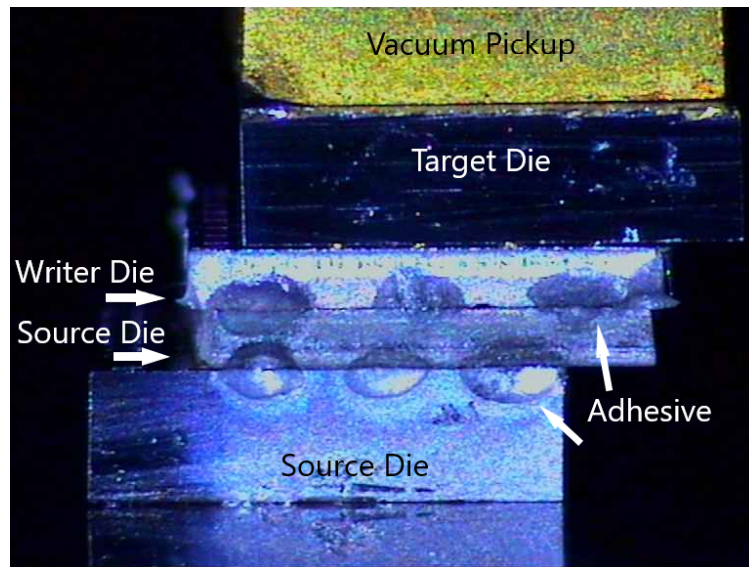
Side view image of the 3 die alignment showing the added adhesive.
